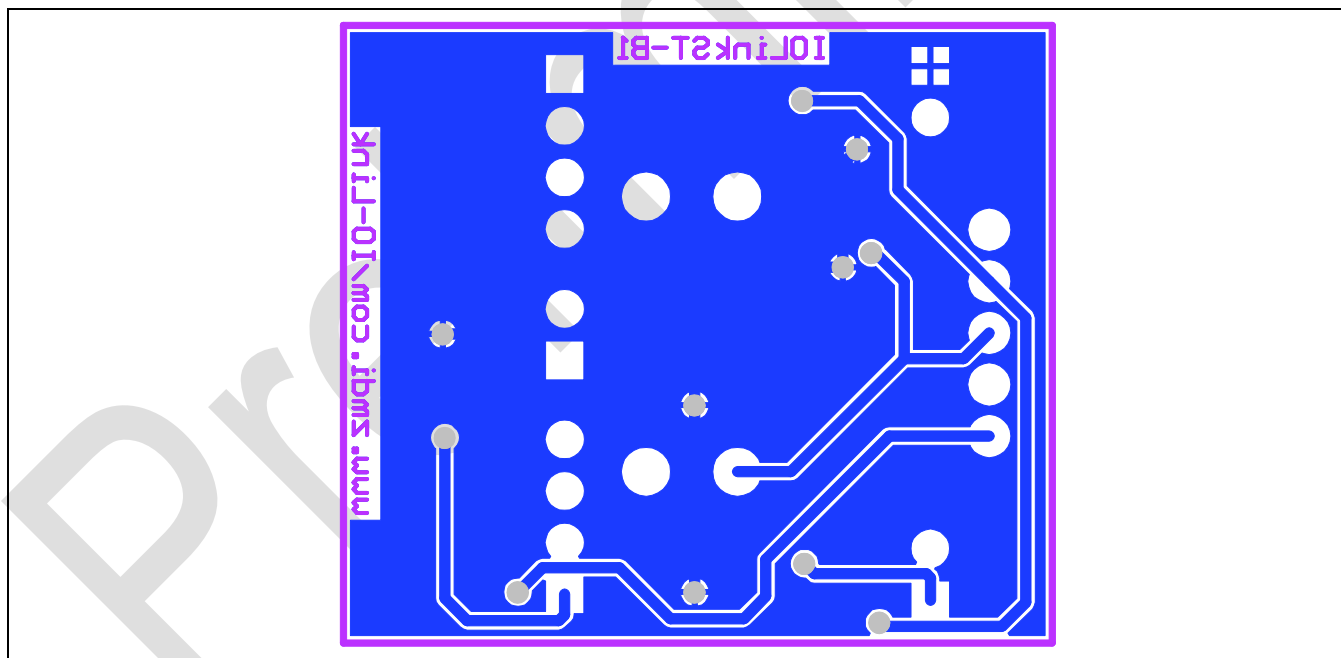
Layout Bottom Layer ZIOL2401 Starter Kit Extension Board
